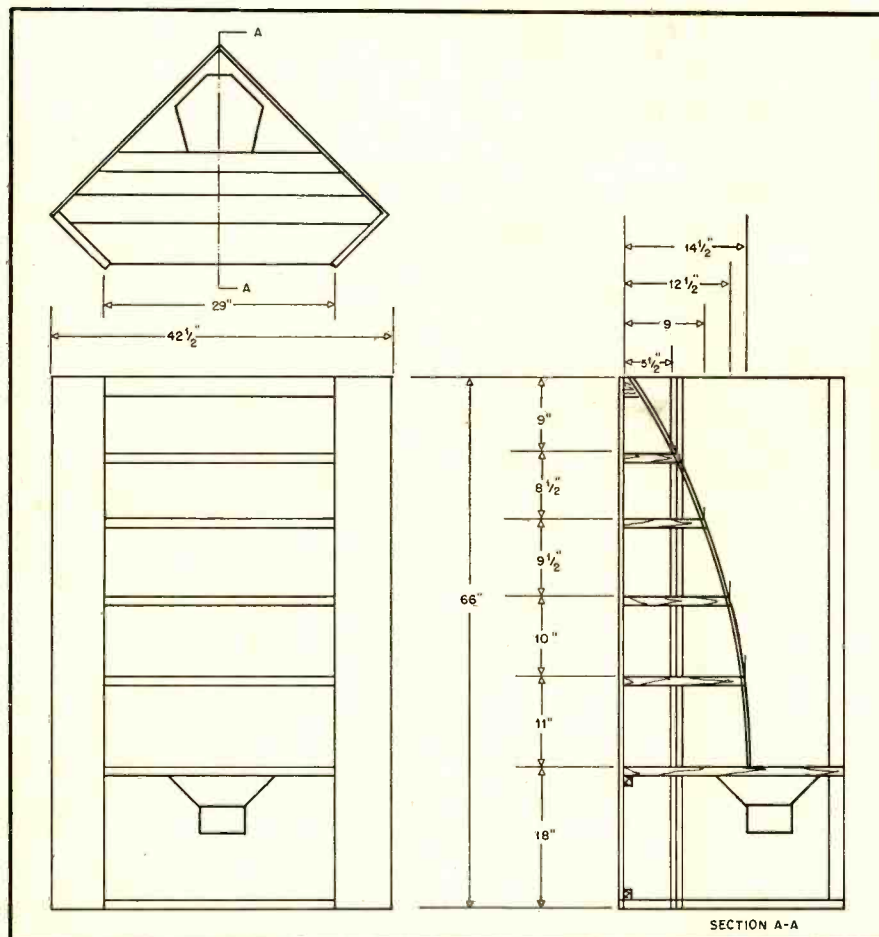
Constructional details for the vertical corner horn speaker, showing top and front views, together with section through the center of the unit.
